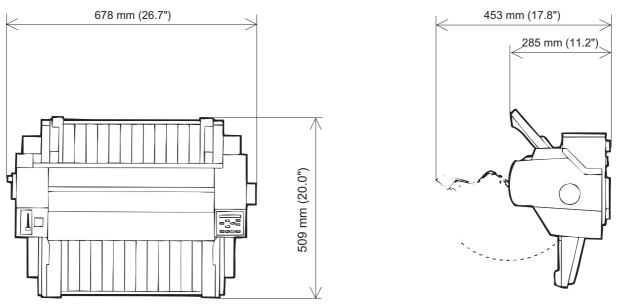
Physical Dimensions and Weight of DLQ-3000+
